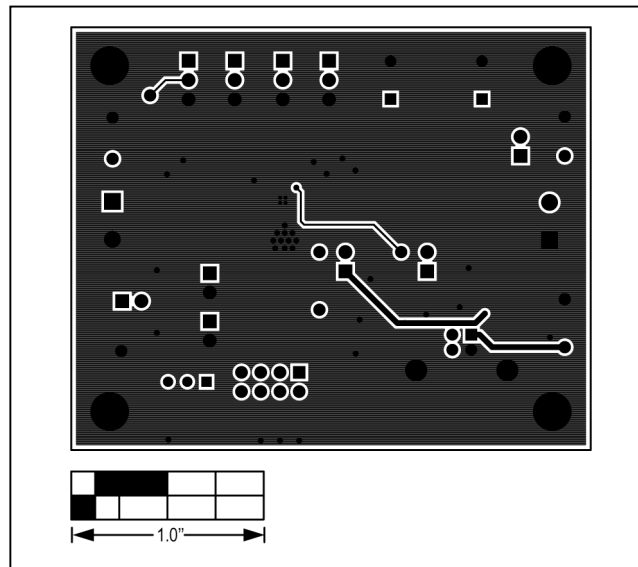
MAX14588 EV Kit PCB Layout—Solder Side
